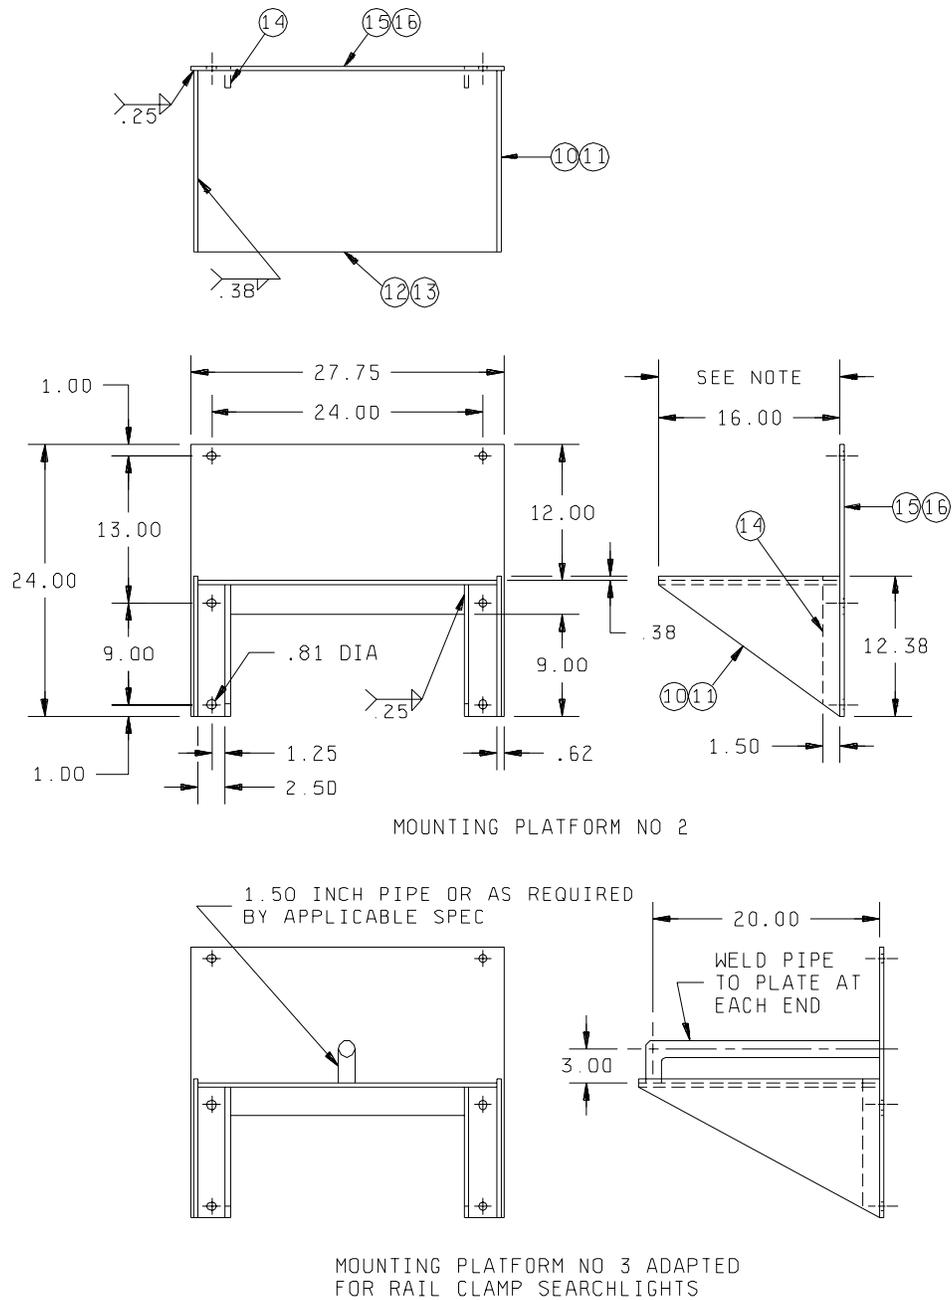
Standard mounting-fixtures for deck or platform mounted parts - Continued.
